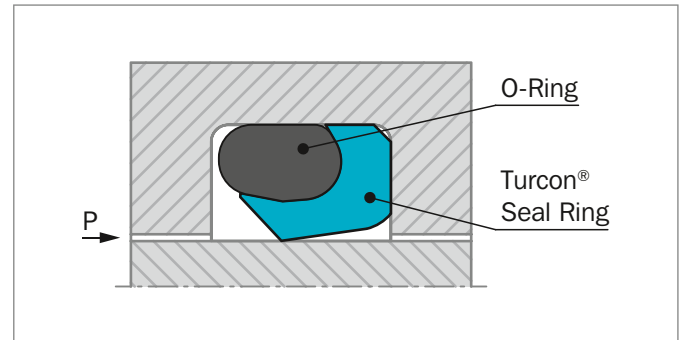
Turcon® VL Seal® mounted in O-Ring groove
